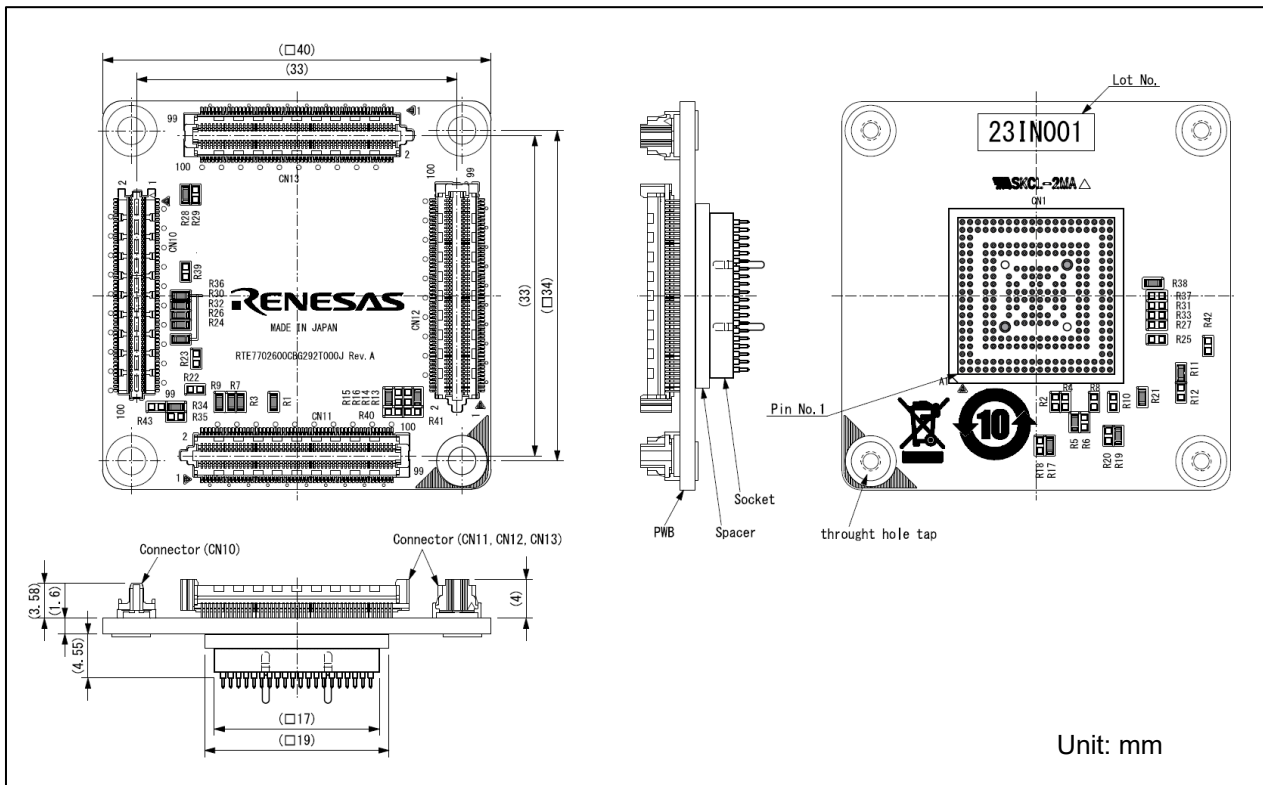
Dimensions of RTE7702600CBG292T000J and RTE7702606CBG292T000J (FBGA292)
